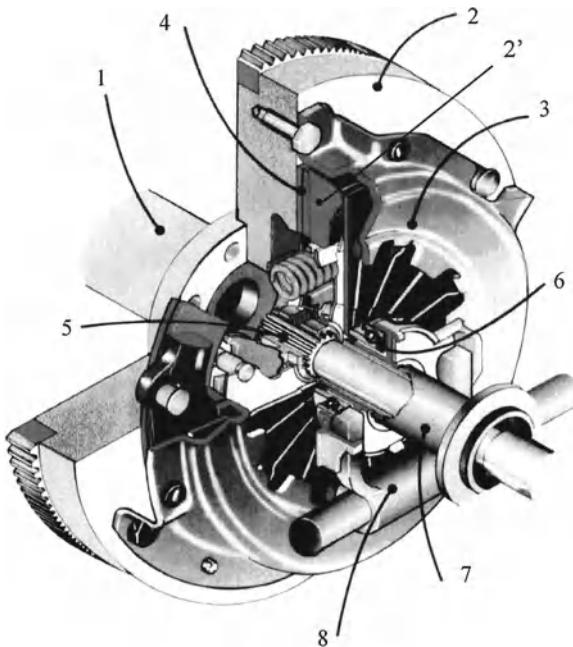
Cut-out view of a diaphragm spring clutch. 1 Engine shaft. 2 Engine flywheel and driving plate. 2' Pressure plate. 3 Cover and internal engagement mechanism. 4 Driven plate. 5 Gearbox input shaft. 6 Thrust bearing. 7 Thrust bearing guide. 8 Disengagement fork (from Genta and Morello 2009)
